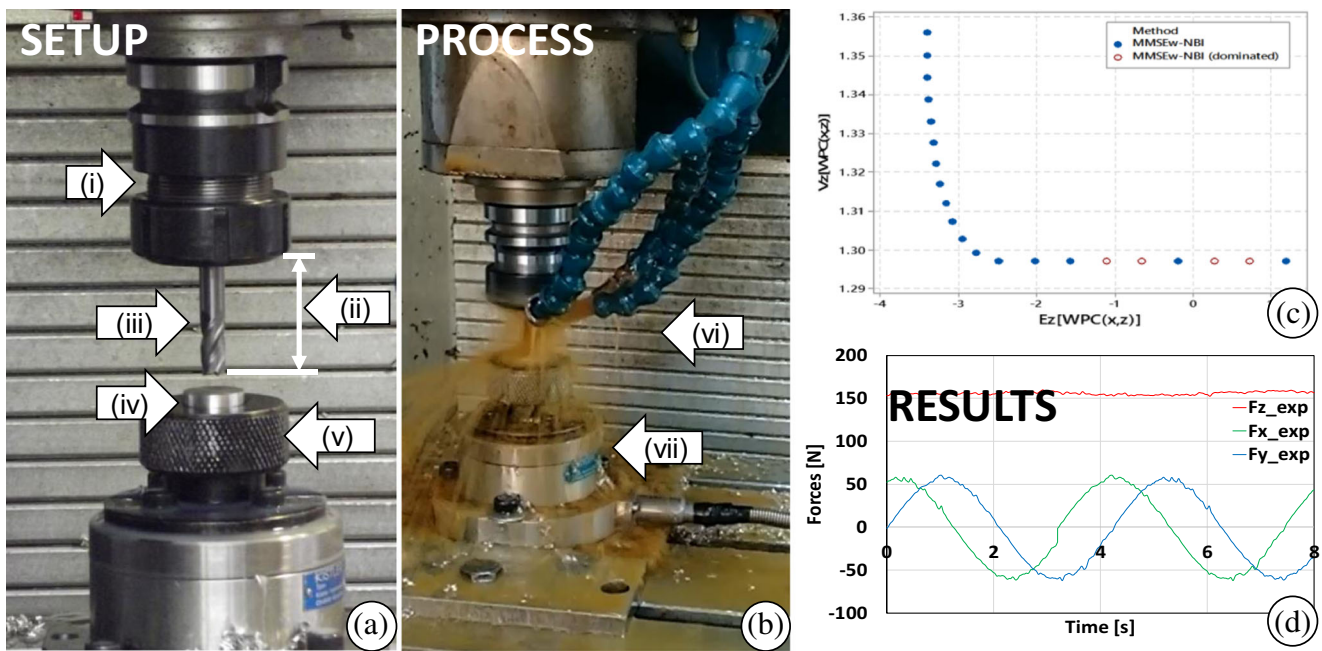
Experimental procedure (i) holder, (ii) tool overhang length, (iii) tool, (iv) workpiece, (v) fixture, (vi) hole-making through helical milling, (vii) dynamometer
